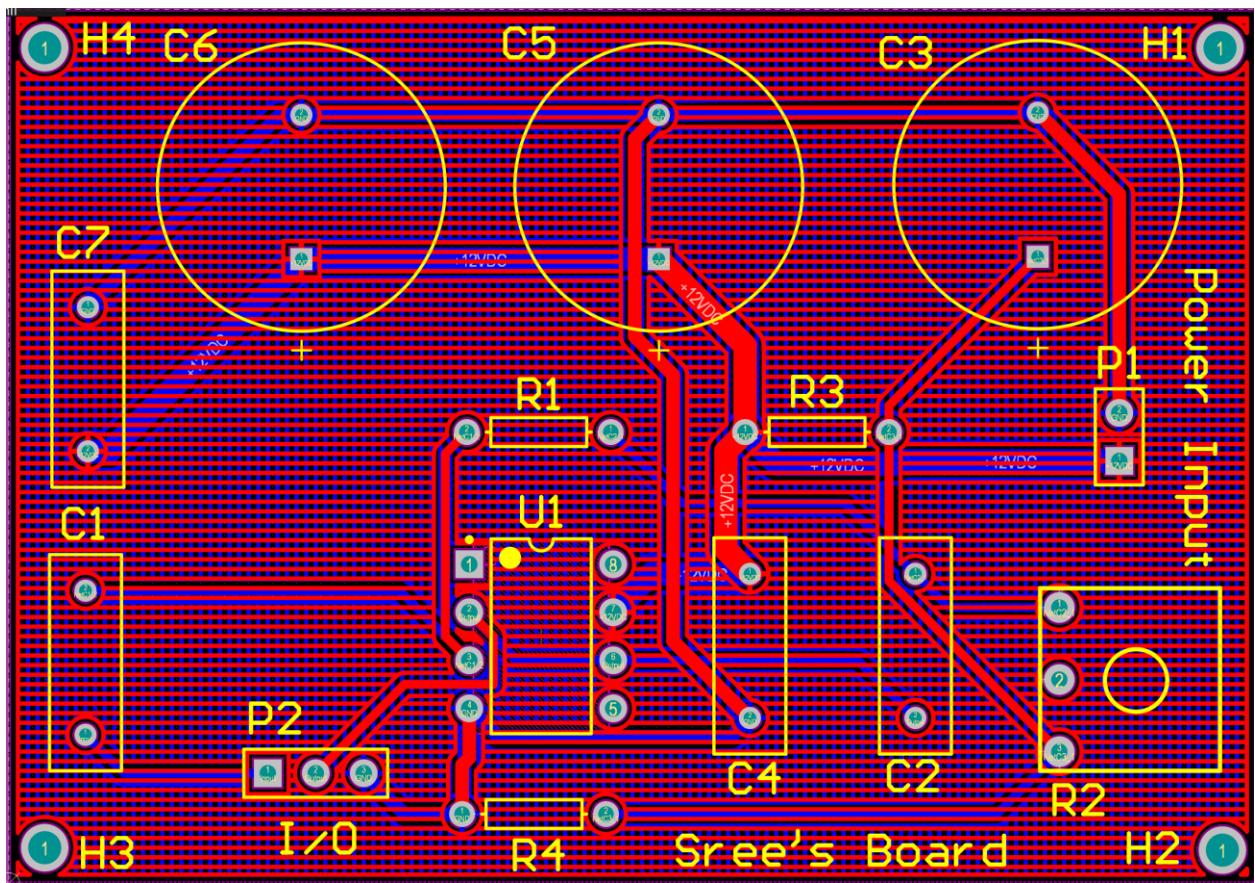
Bottom Layer Image of PCB with GND Copper Pour
